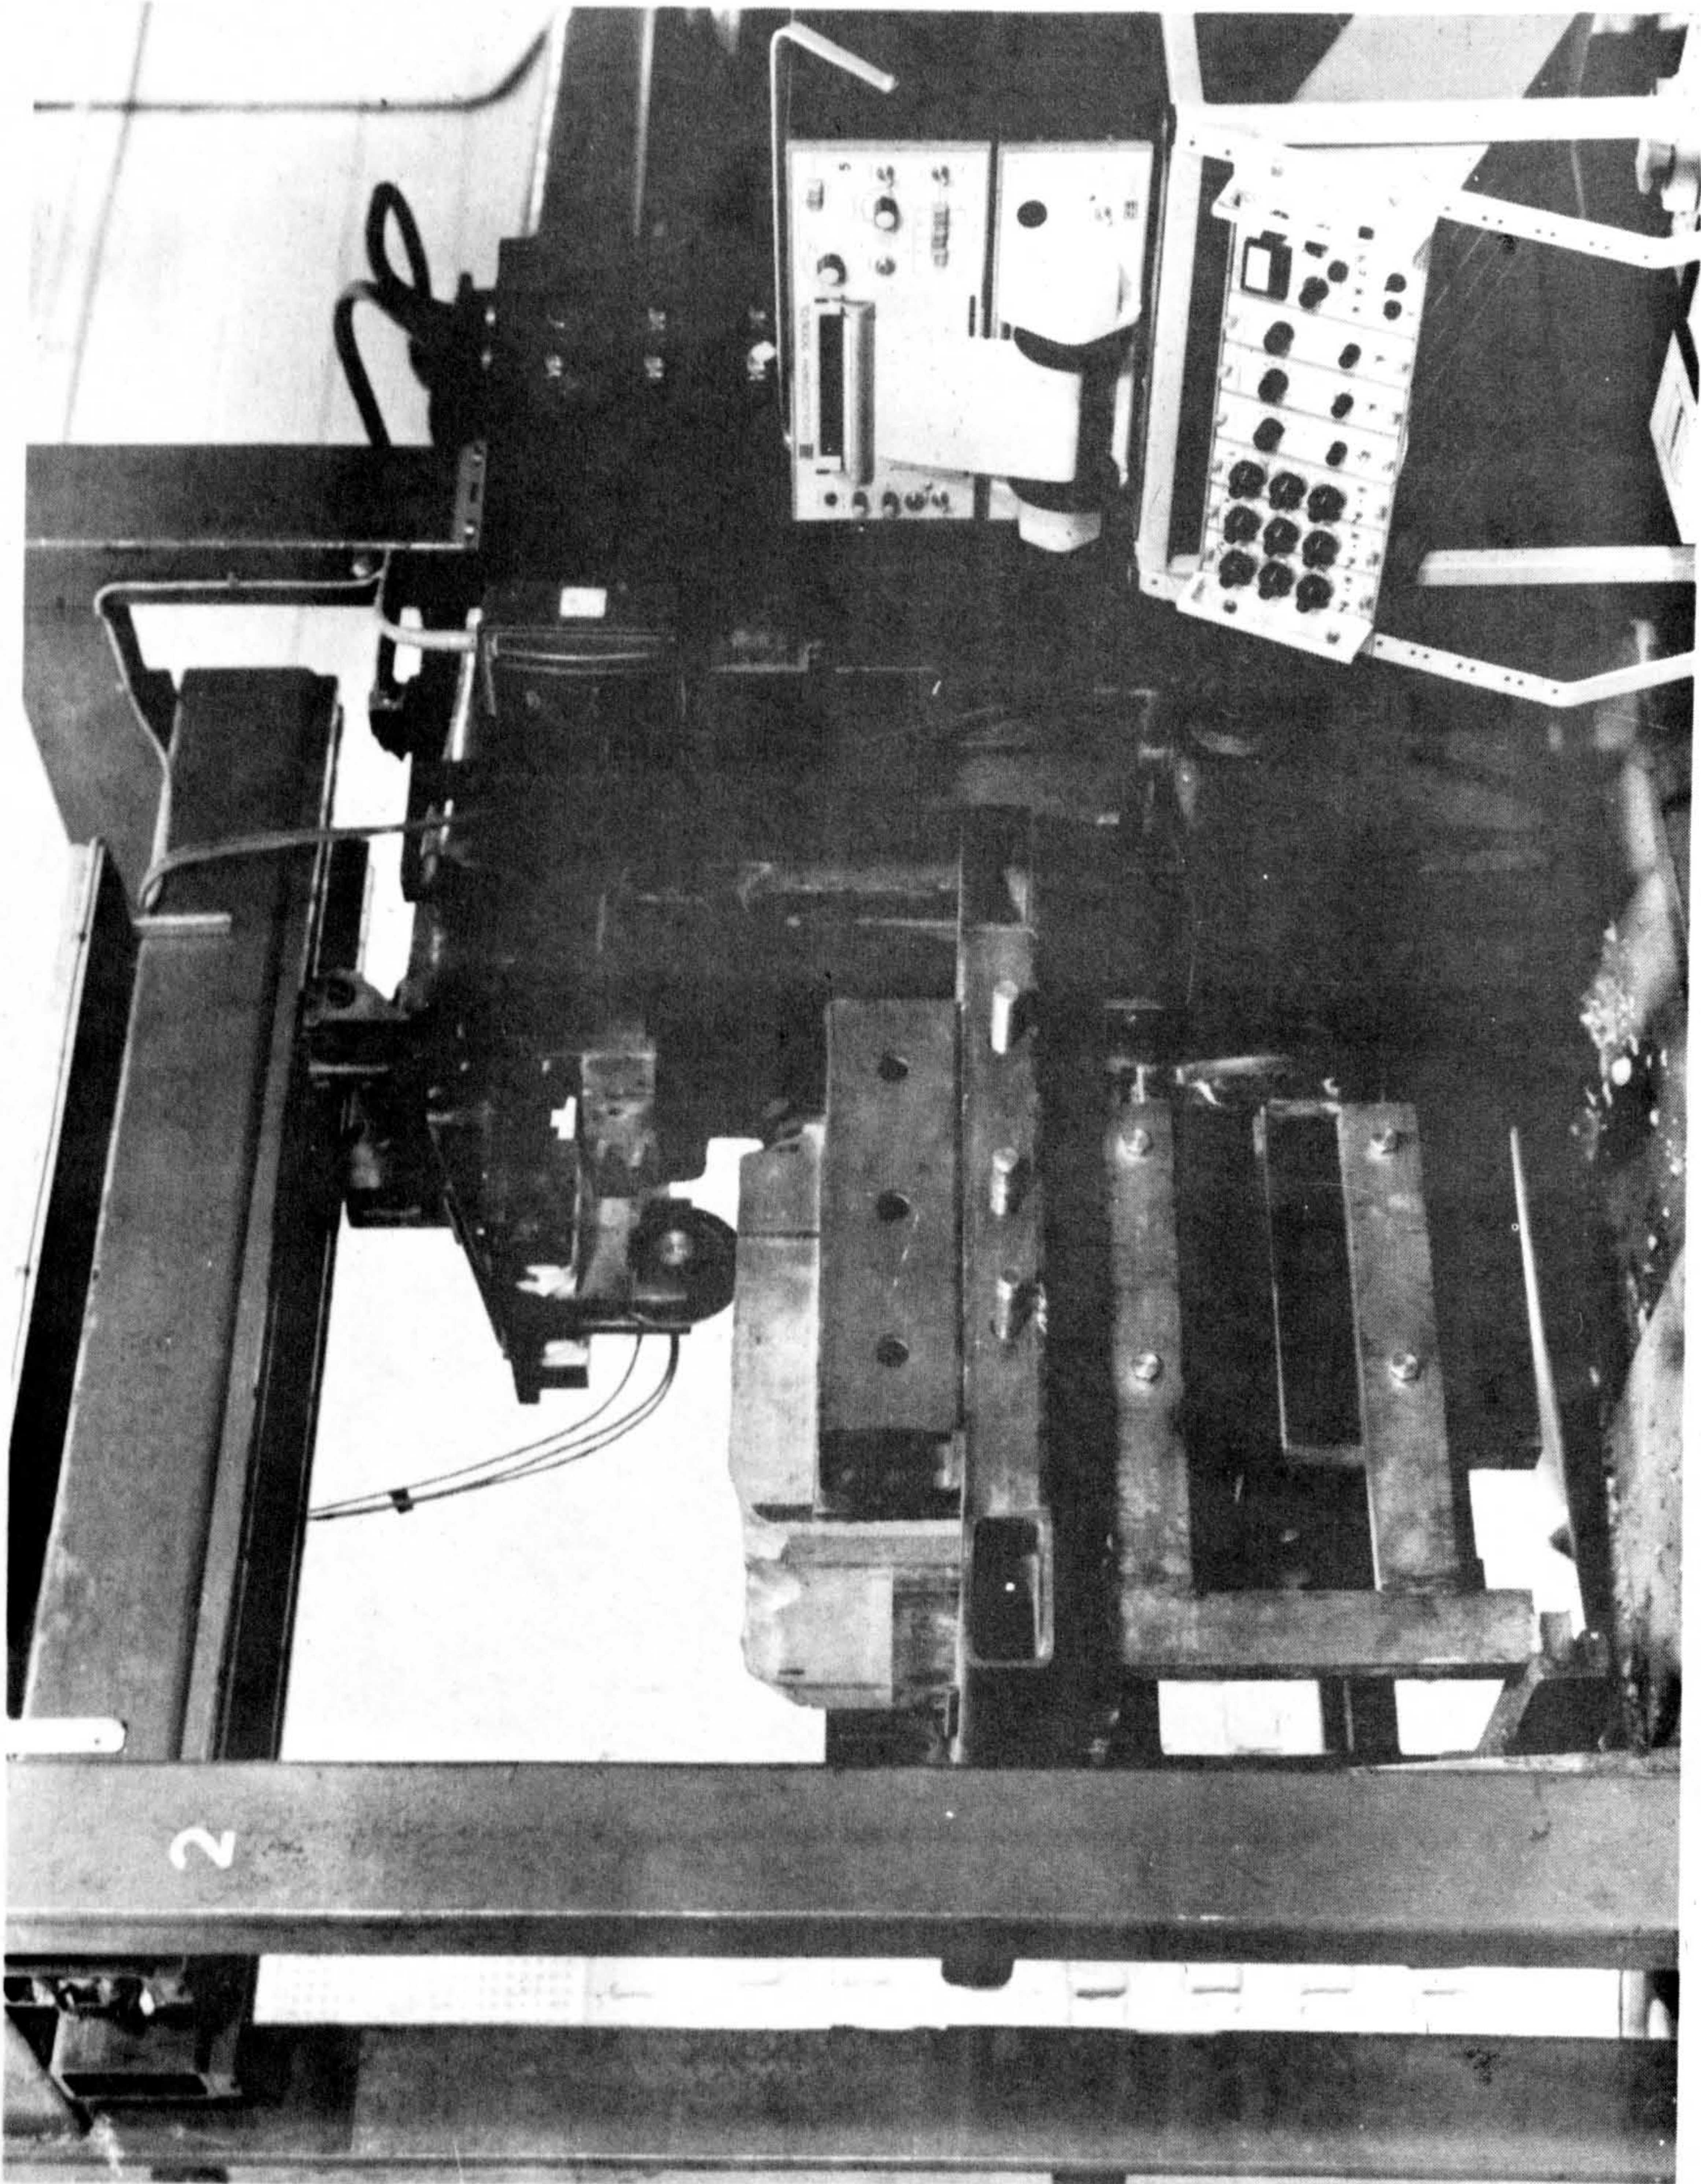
A Modified Kelly Shaping Machine with Instrumentation.
